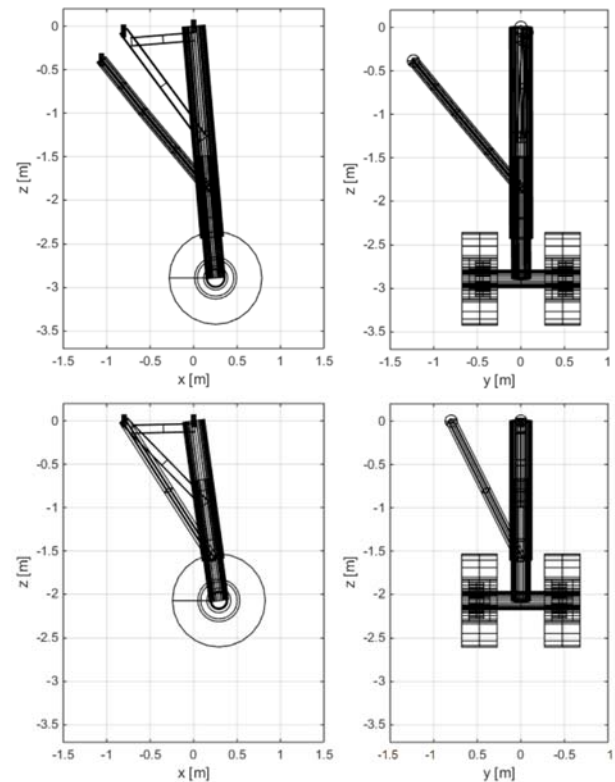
Dimensions of the conventional landing gear (above) and the fuselage integrated body landing gear (below)
